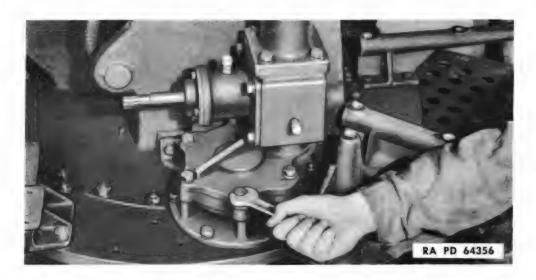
Separating Upper and Lower Traversing Mechanism Housings
